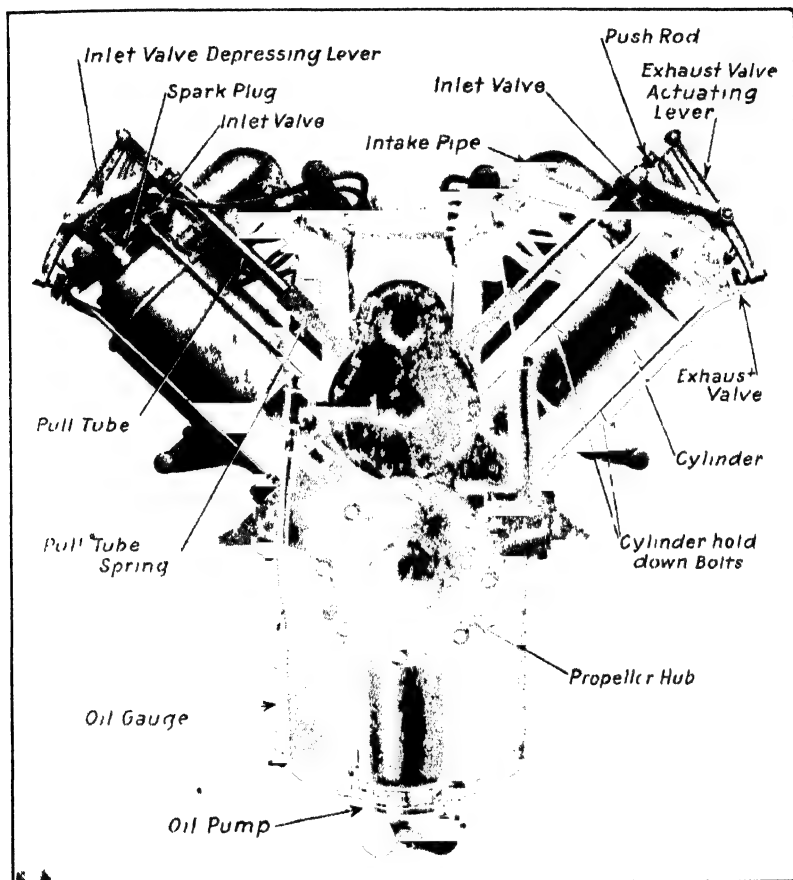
Front View of Curtiss OX3 Aviation Motor, Showing Unconventional Valve Action by Concentric Push Rod and Pull Tube.
